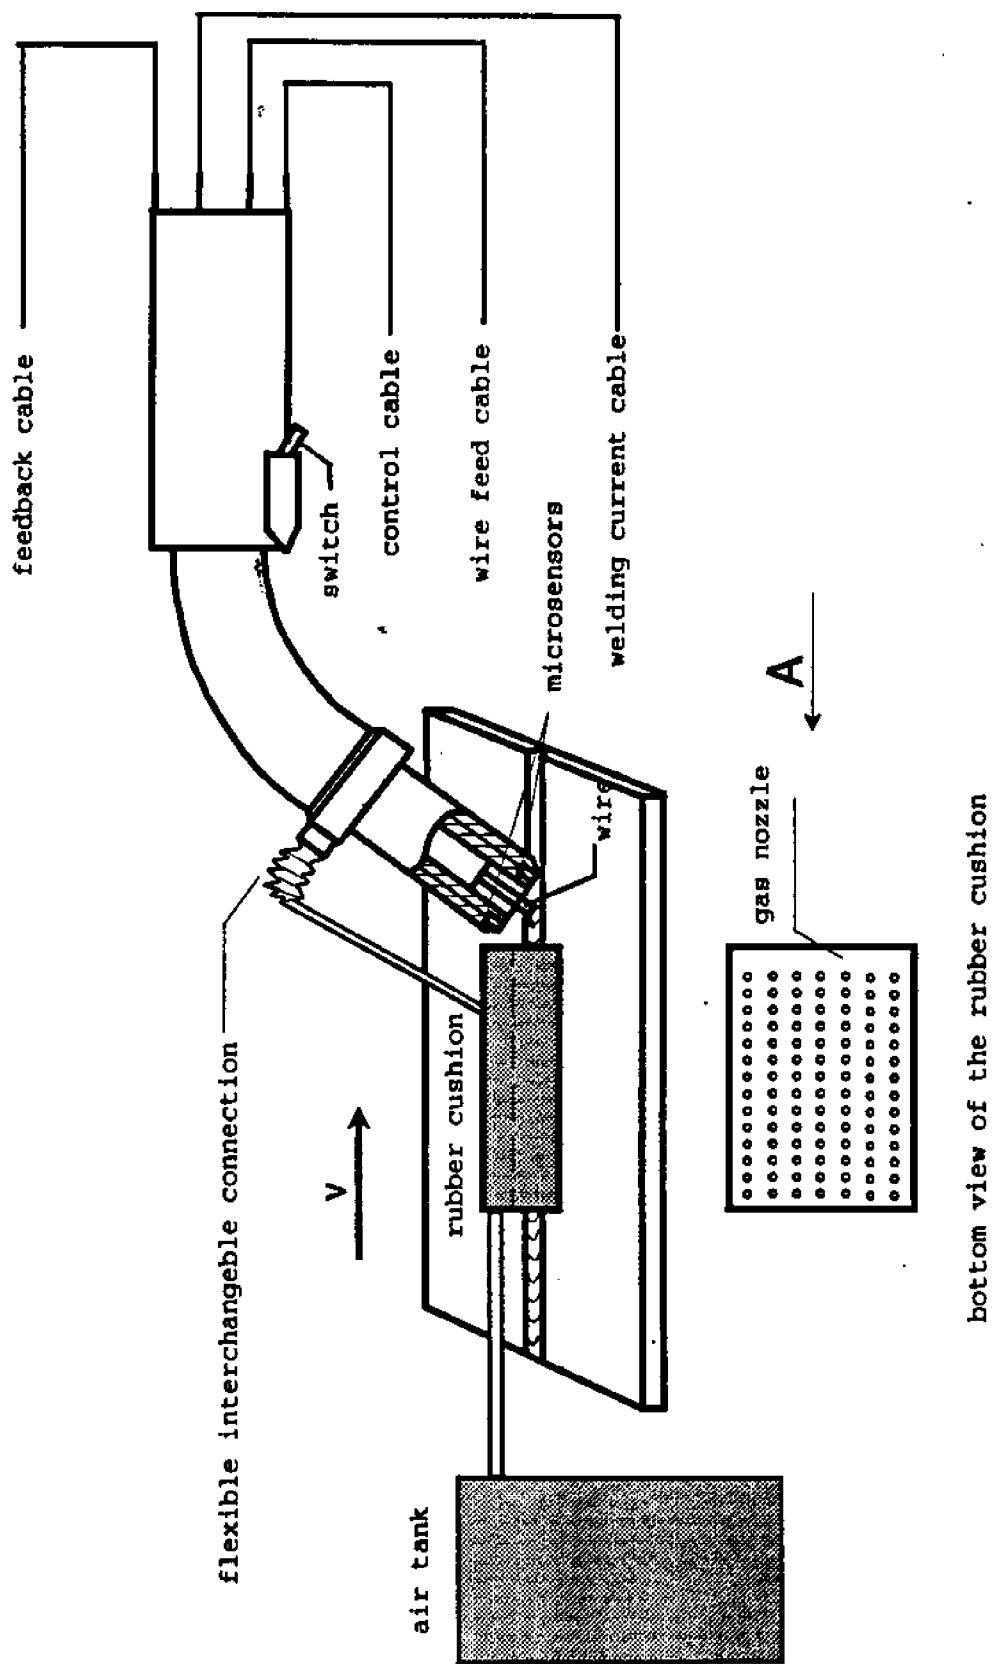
Schematic Diagram of Underwater "Wet" Welding Gun
